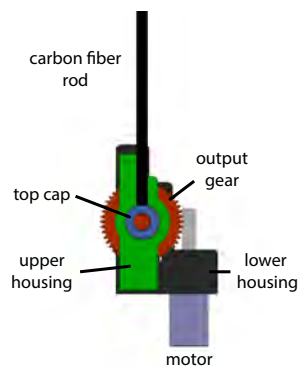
A top view of TD III. A single 48:1 output gear is driven by a worm gear.
